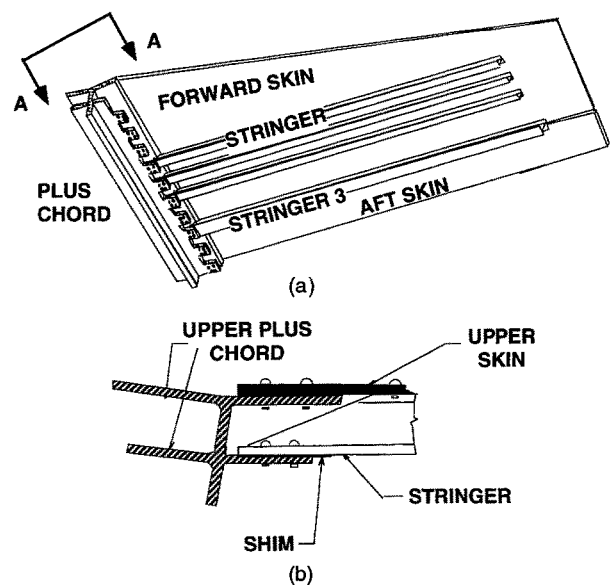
Example assembly (Airplane horizontal stabilizer upper skin assembly). (a) The assembly. (b) Section A-A.
